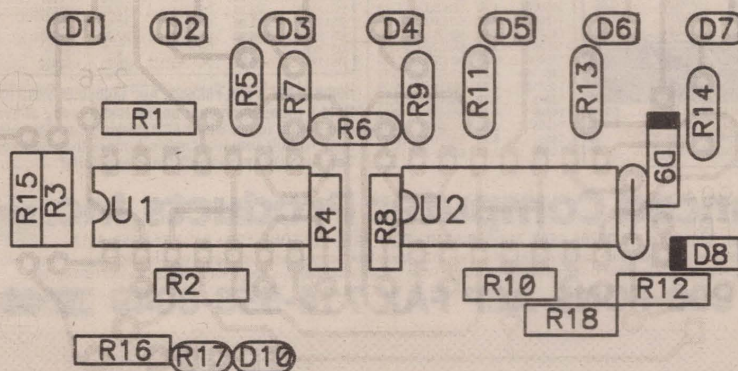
Parts layout. For 5VDC unit, use jumper in place of D10.
